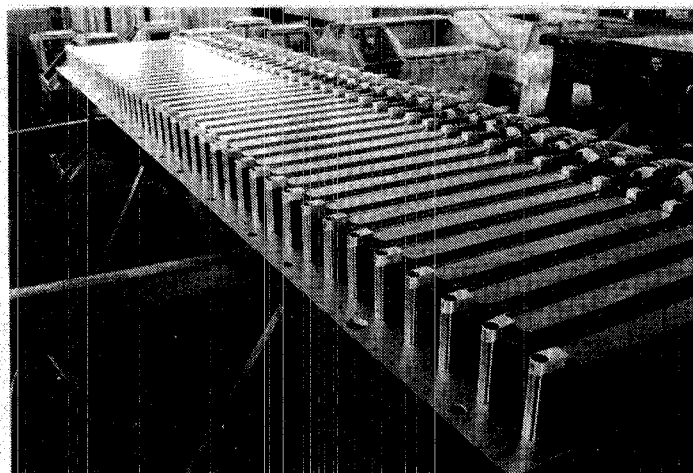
Lower half of the undulator, showing pole pieces, coils and electrical-hydraulic connections.
